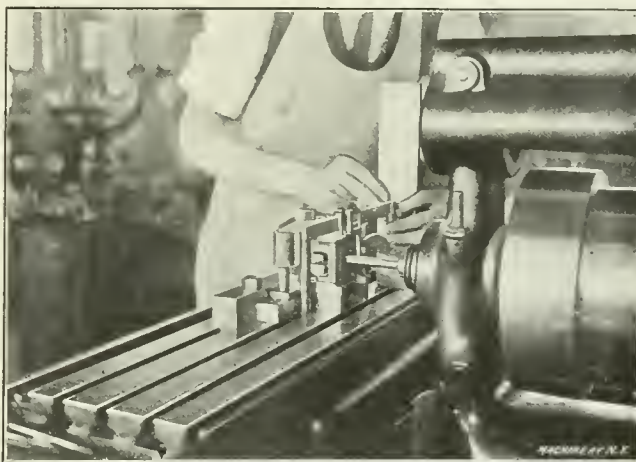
One Method of Setting the Work—Making a Horizontal Adjustment
